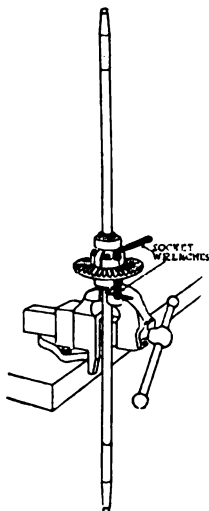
The differential may be most readily assembled and adjusted, if caught in the vise in this manner. Two socket wrenches are used to do the work.
